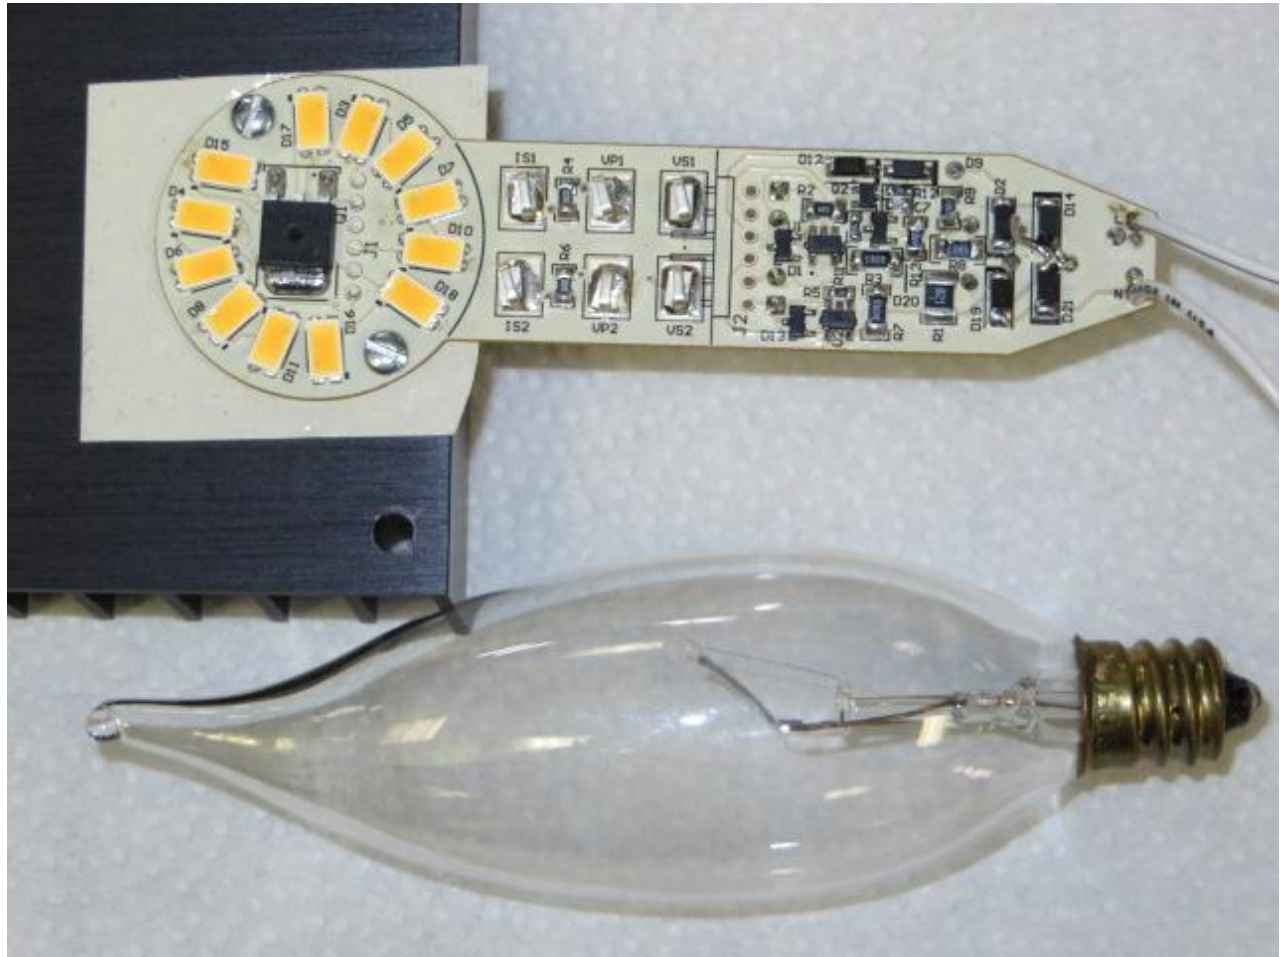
side by side with incandescent E12 candelabra, test point section of PCB is removed (test points used for measuring string voltages and currents).
